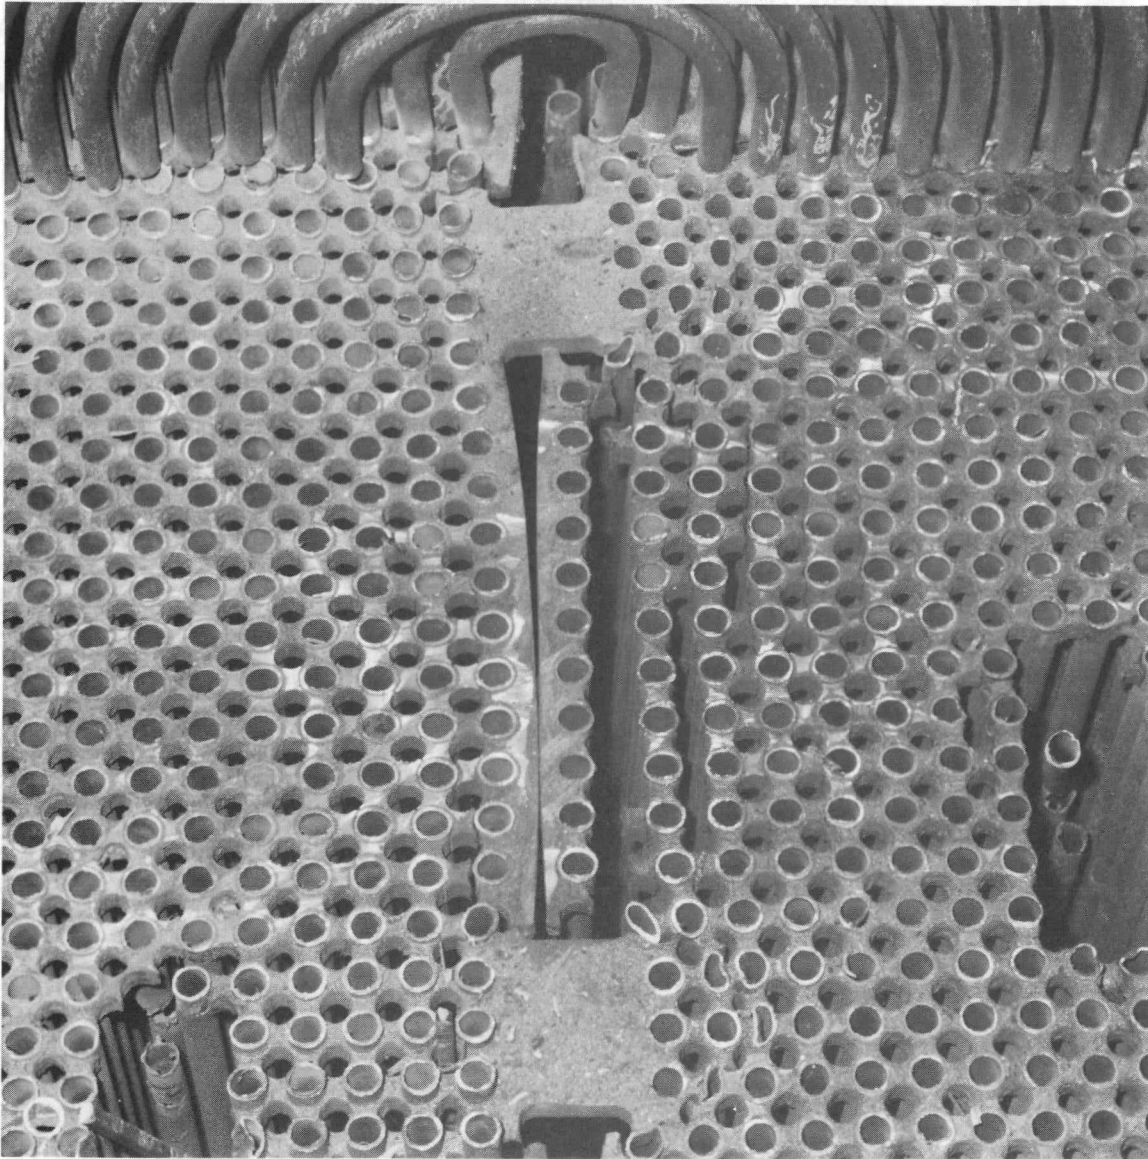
Seventh TSP After U-Bend Removal Showing Support Plate Cracking and Tube Denting
